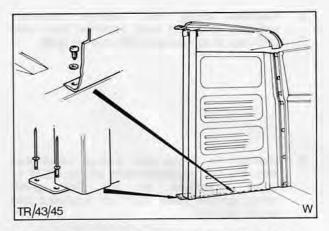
Partition panel rail and bottom flange assembly to floor pan
